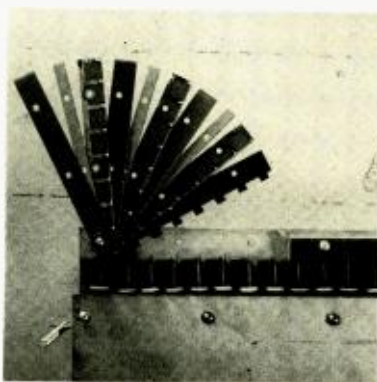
One end of a key-switch assembly, showing the switch blocks, printed-circuit output busses, and separators.
